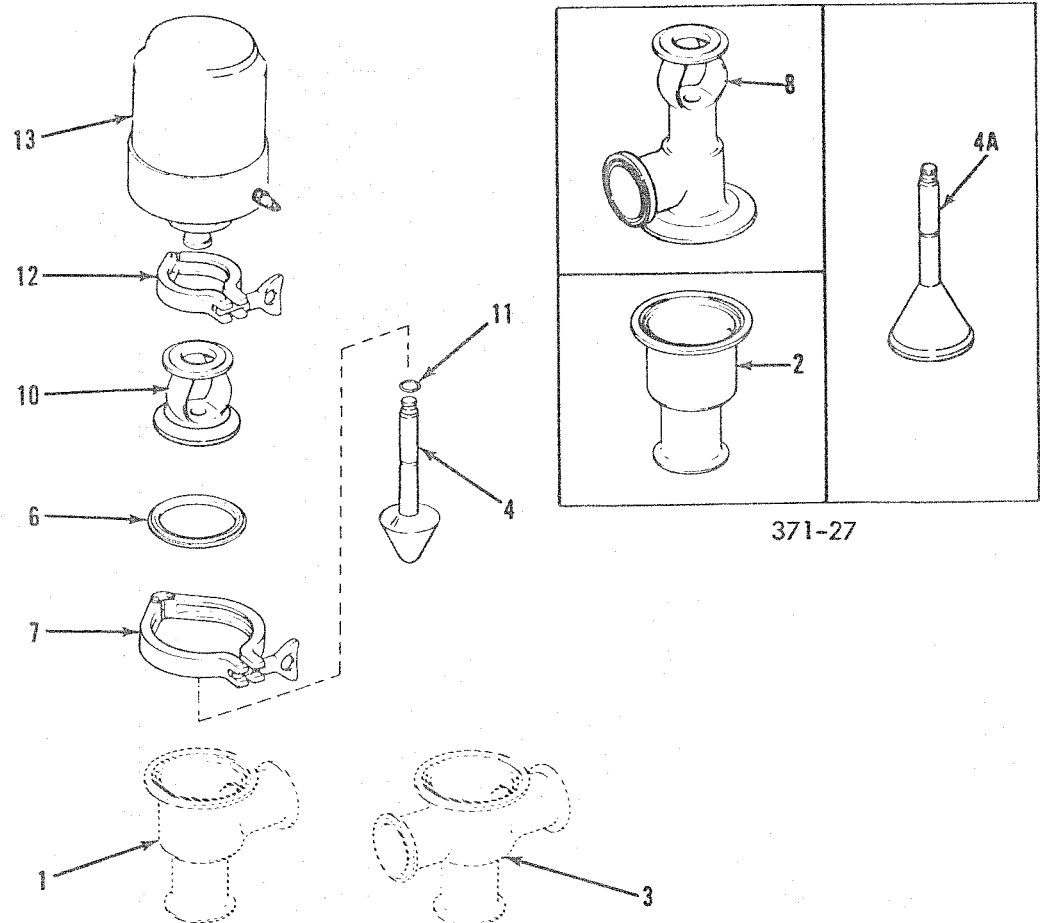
Type 371-10, 371-30 & 371-27 Throttling Valve, Exploded View
